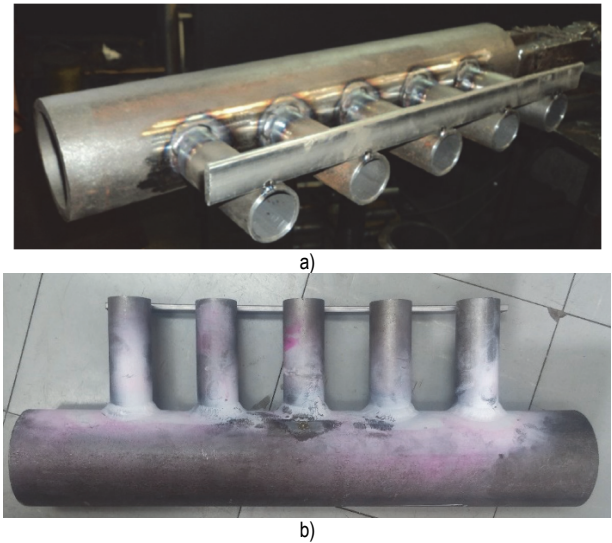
Specimen B: a) during welding nozzles to header, b) after NDT penetrant testing
